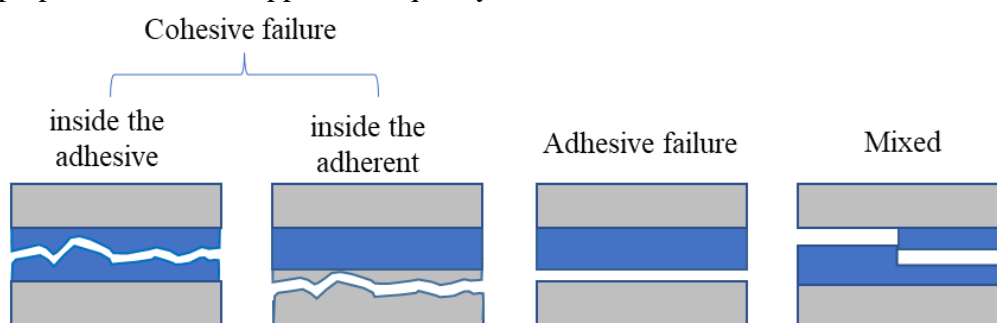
Failure modes of an adhesively bonded assembly.
